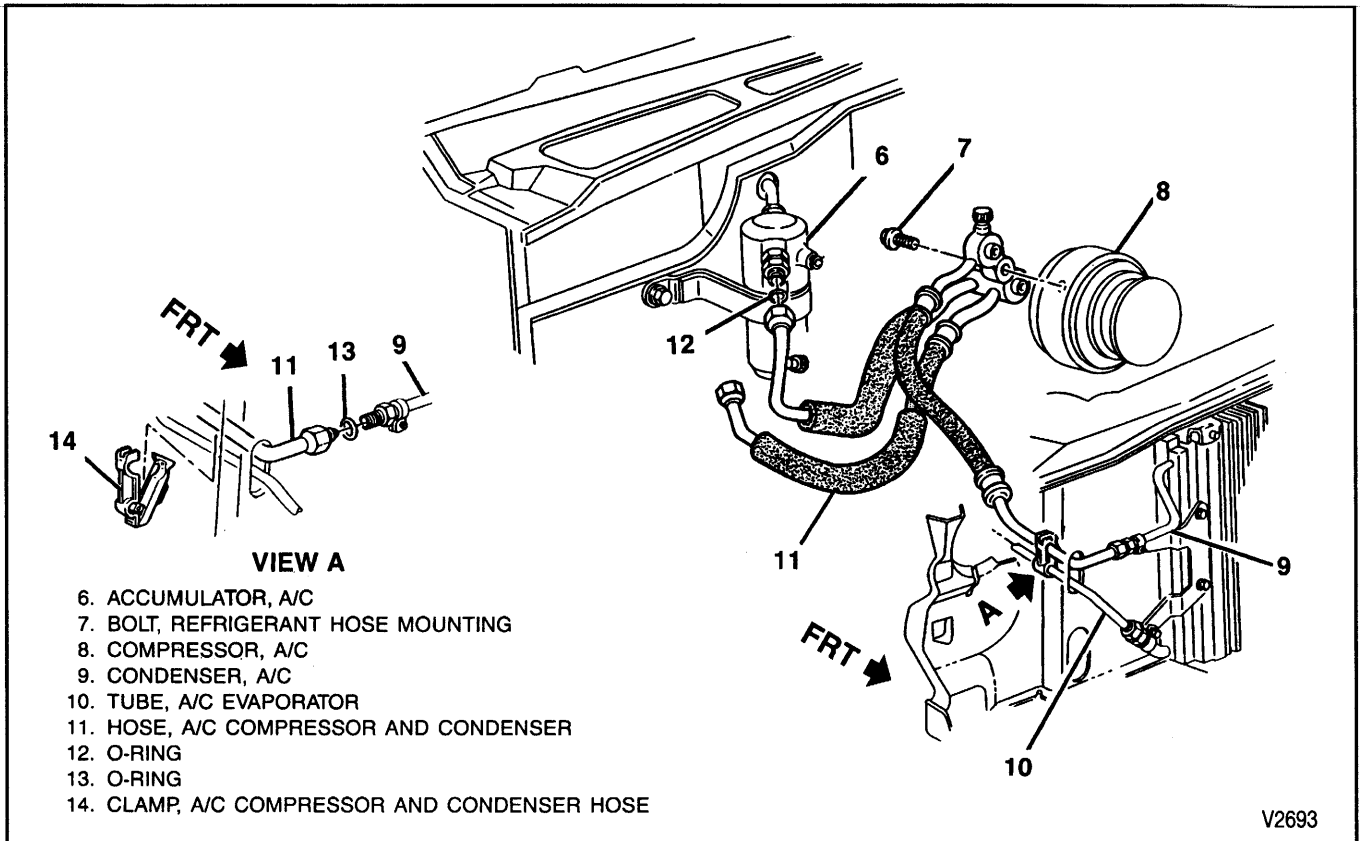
Compressor and Condenser Hose Assembly (7.4L Engines)
